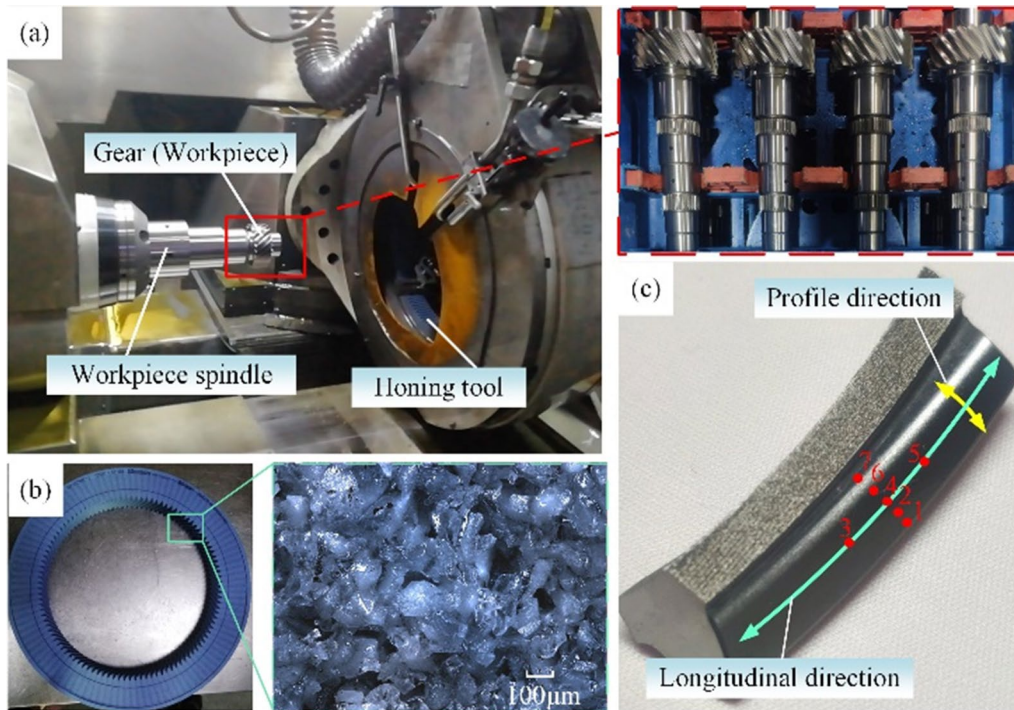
Experimental design for honing tests: a Gear honing machine and honed gears, b Honing tool and its surface abrasive particles, c Single tooth and its measurement areas
